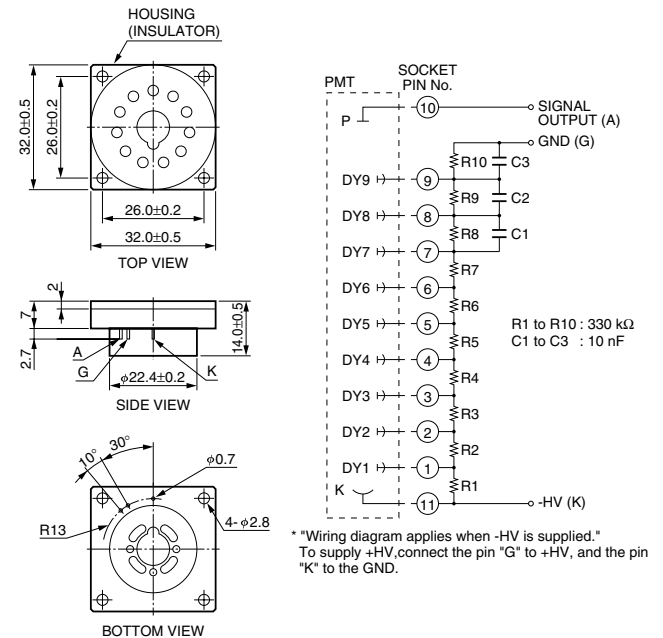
D Type Socket Assembly (Unit: mm) Sold Separately
